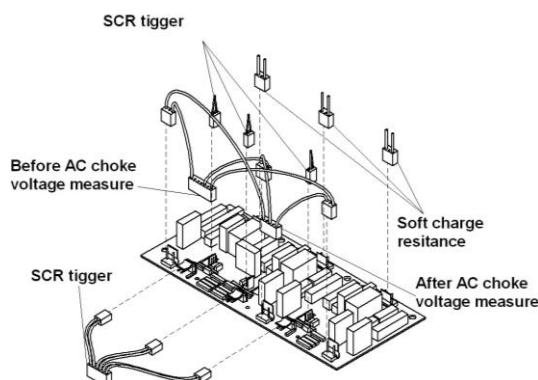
(b) Disassembly of the Snubber, Trigger and Soft charge protection
